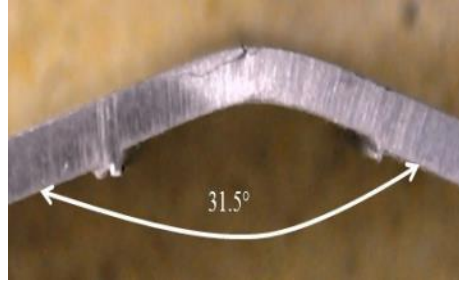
Example of Fracture/ Defect Formed during Bending Test
